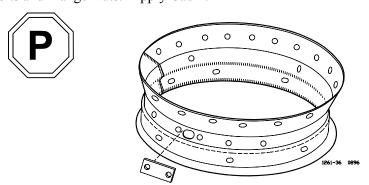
Hopper Collar Access Hole and Hole Cover Plate
